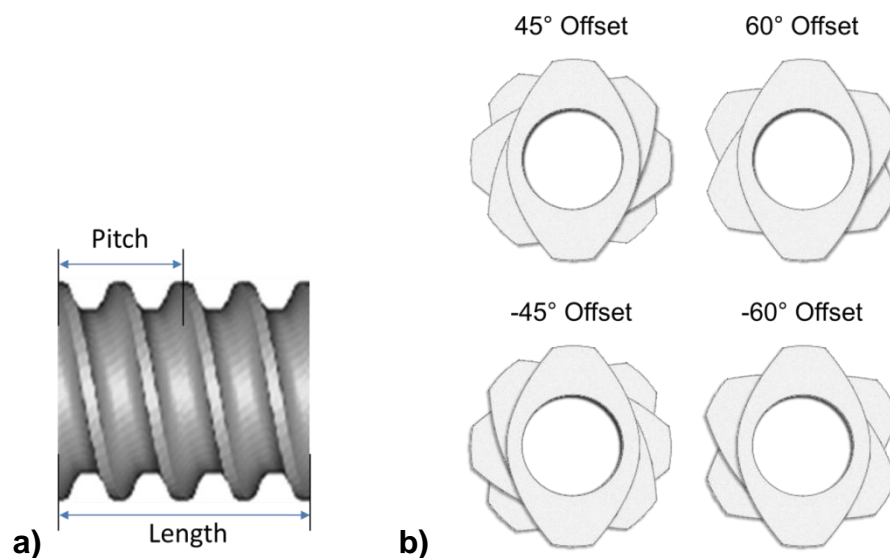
Conveying (a) and kneading block (b) element geometry. (Conveying screw element image was modified from Ludovic®. Conveying element is depicted from side view, while kneading elements are depicted from axial view.)
